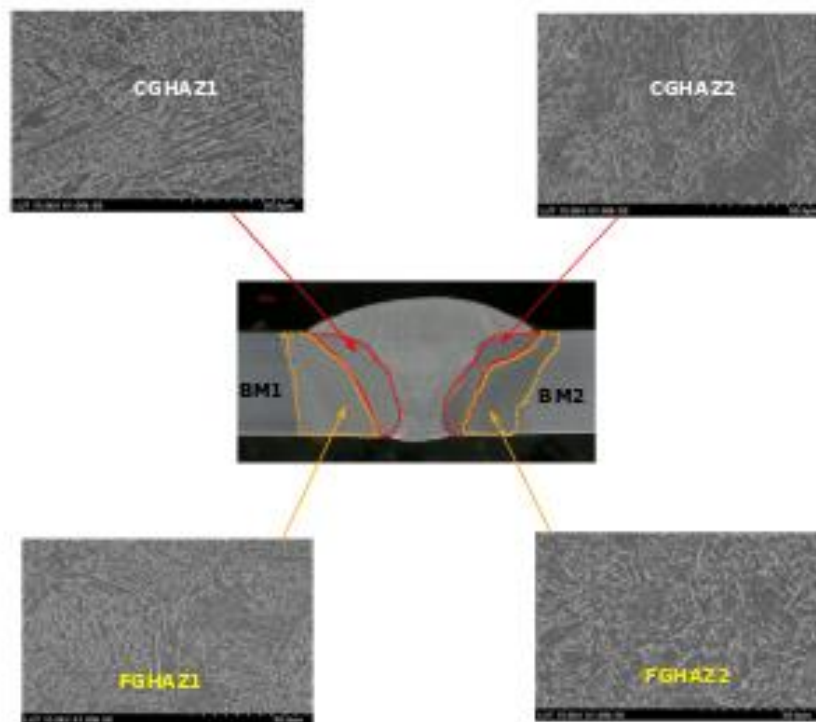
Microstructure formation of dissimilar S700MC/S960QC steel welded joint using GMAW and filler wire (Nicro700).
